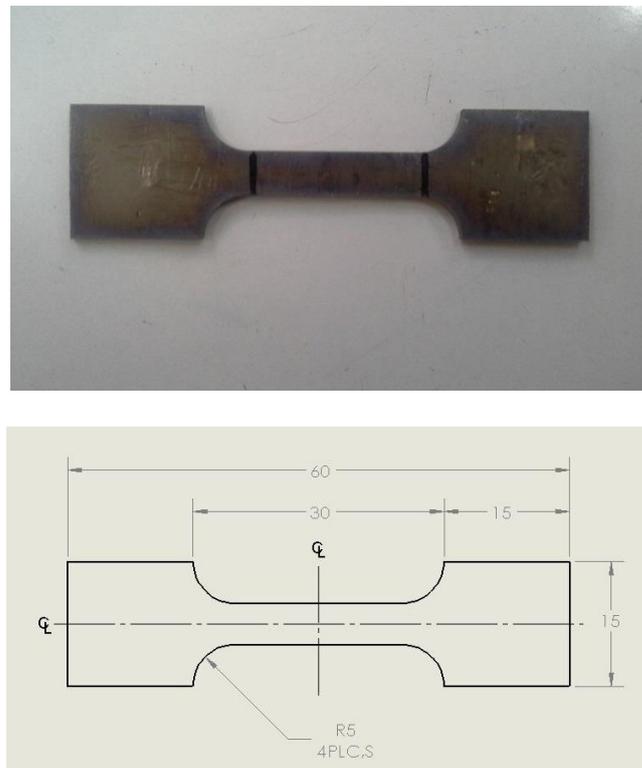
Tensile test specimens and their dimensions (Dimensions are in millimeter).
